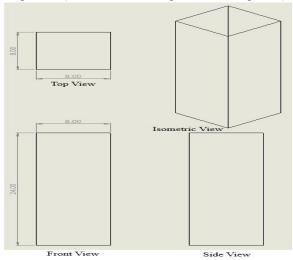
(2D and 3D Drawing of Collecting tank)
